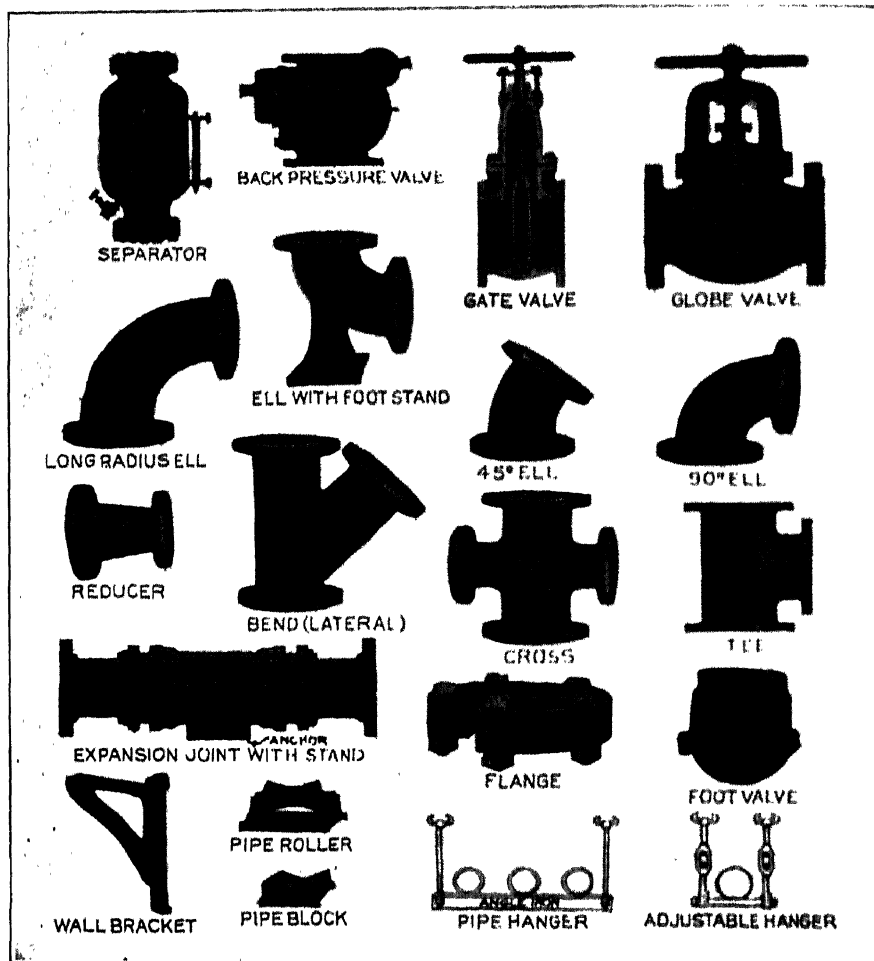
Flanged fittings. (Crane Co., Chicago, Ill.)
